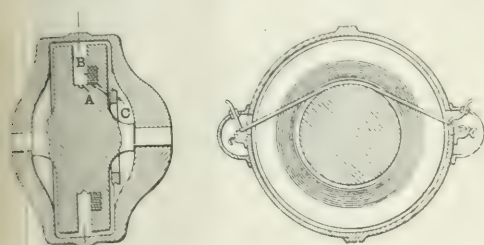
Gyrostator with Flywheel Carrying a Magnetizing Coil.
